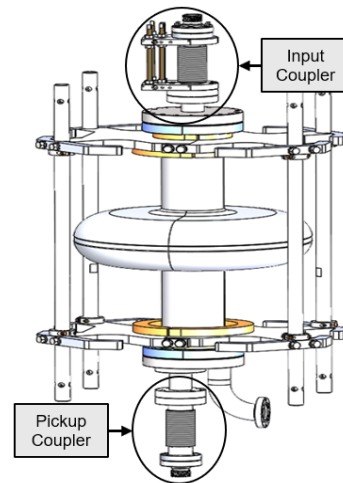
Model of vertical test assembly of the FRIB400 R&D cavity.
